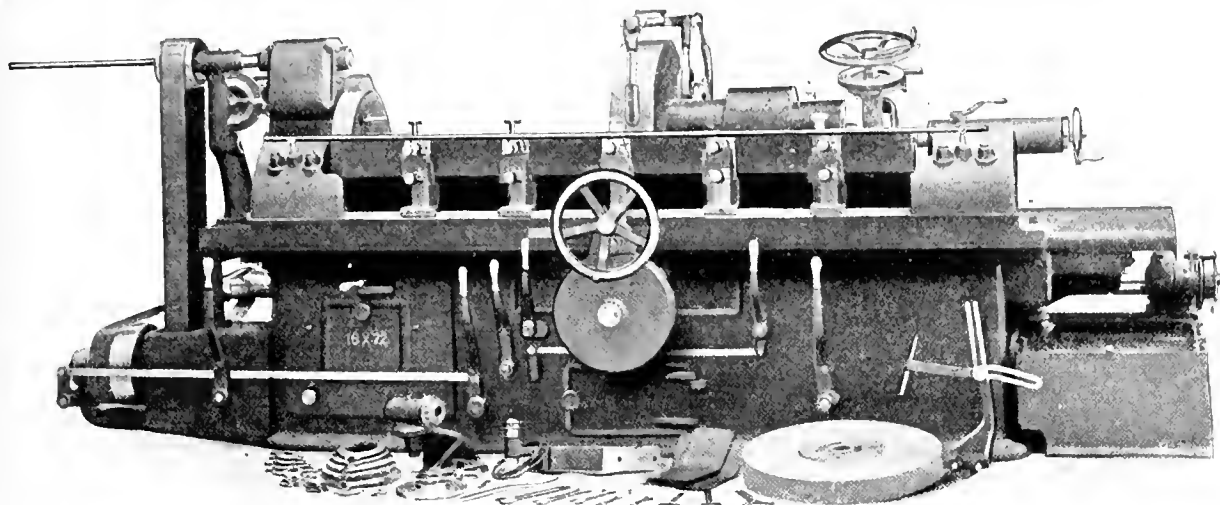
Landis 16 x 72-inch Plain Grinding Machine for Heavy Duty
